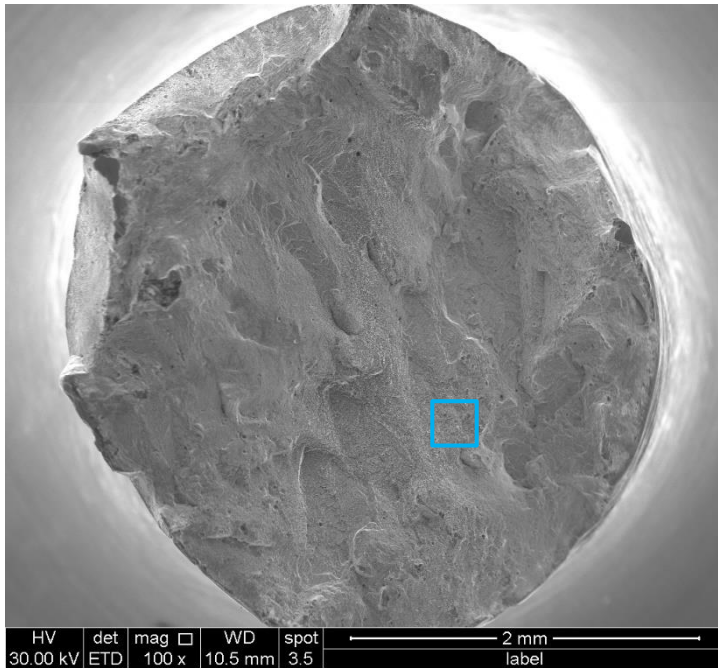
Secondary electron SEM image of a fracture surface of a horizontal tensile specimen.
